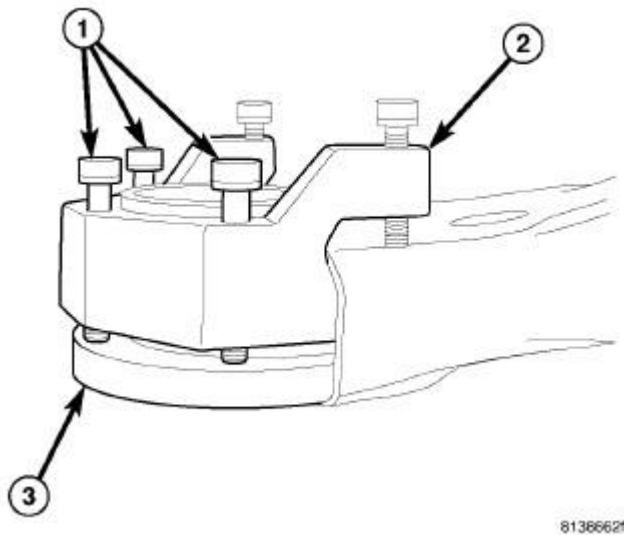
TIGHTEN SUPPORT 9031-11 SET SCREWS
